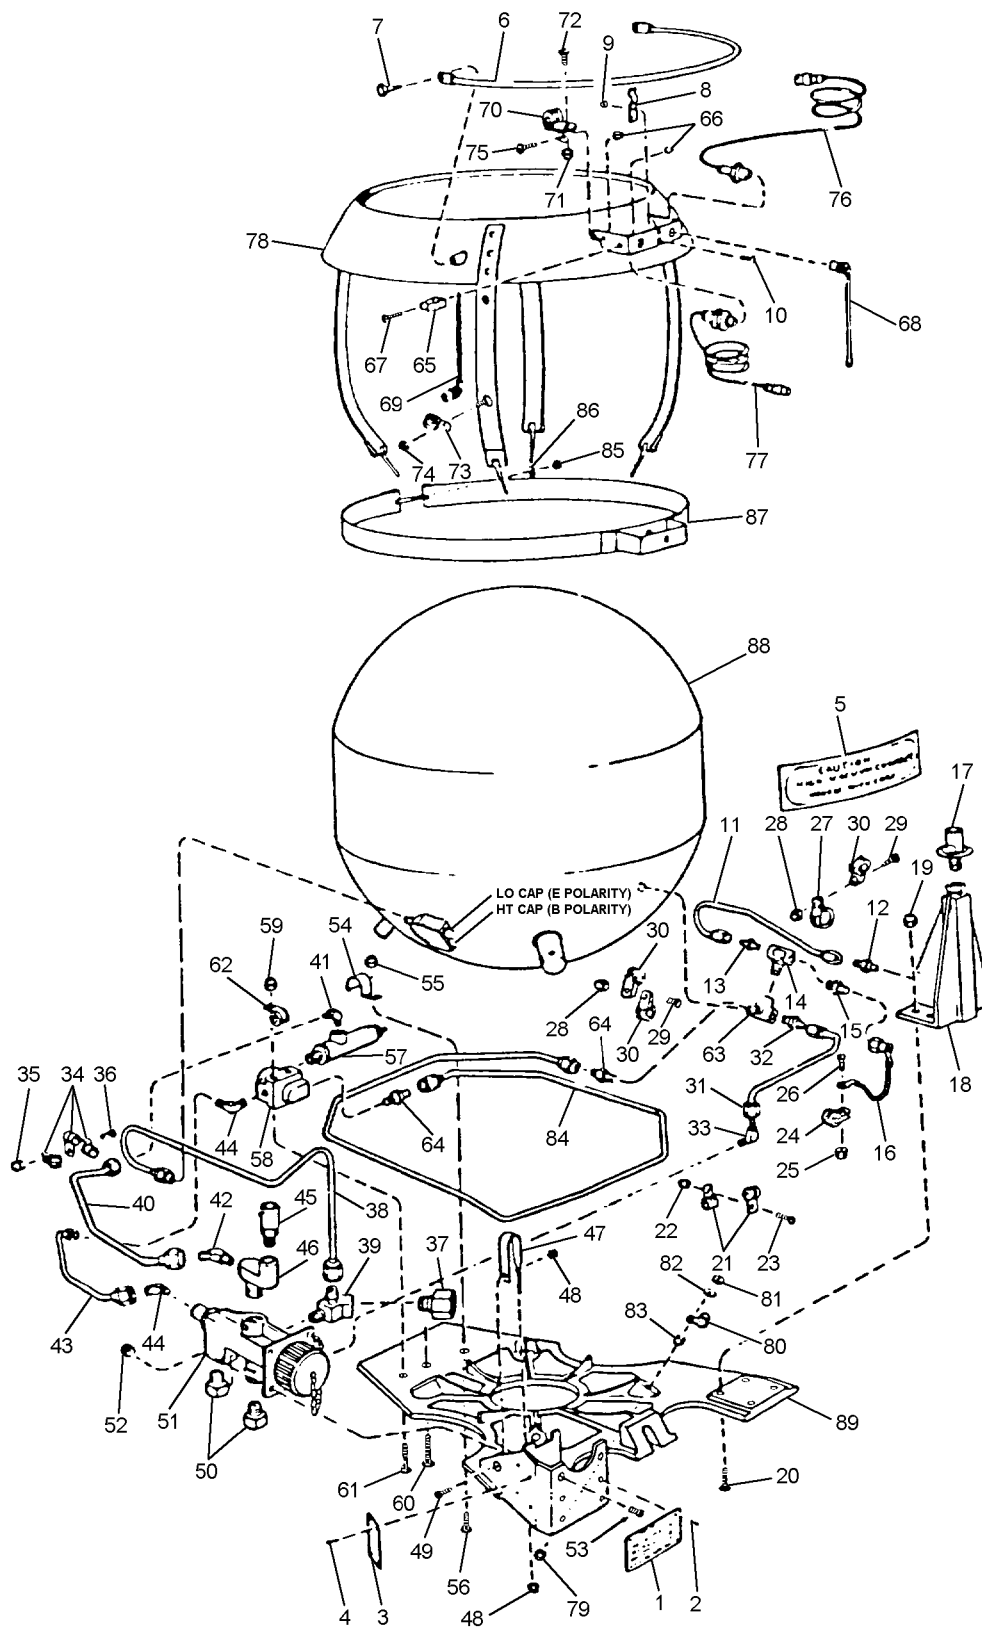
Liquid Oxygen Converter Assembly, P/N 10C-0016-16
